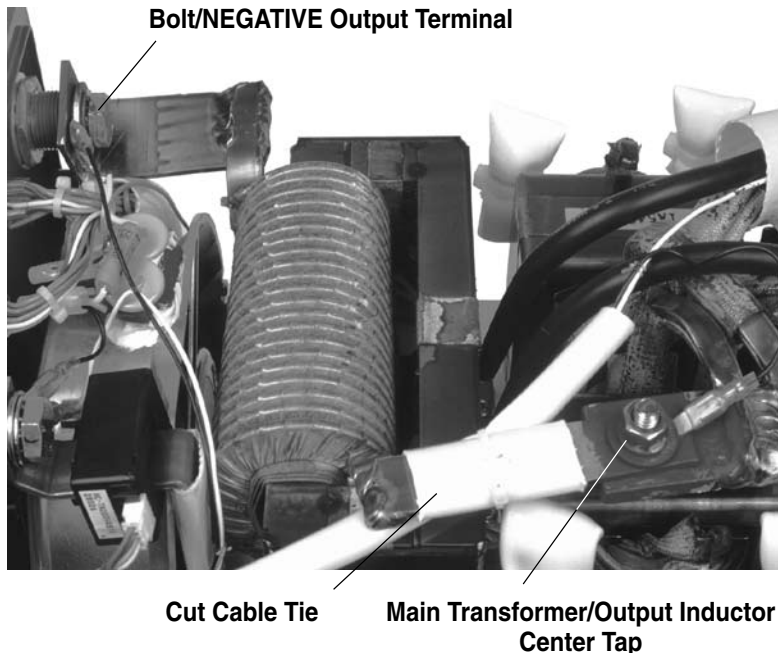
Output inductor assembly removal – initial steps (shown in GMS model)
